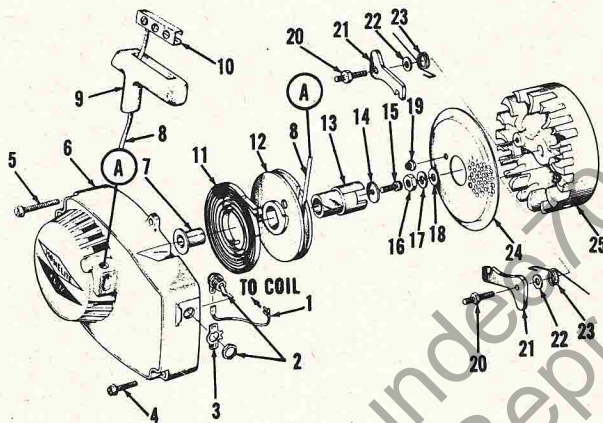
Exploded view of early rewind starter components and related parts. Starter unit is mounted on shaft (starter post) which is an integral part of the blower housing. Refer to Fig. HL42A for late starter assembly.
